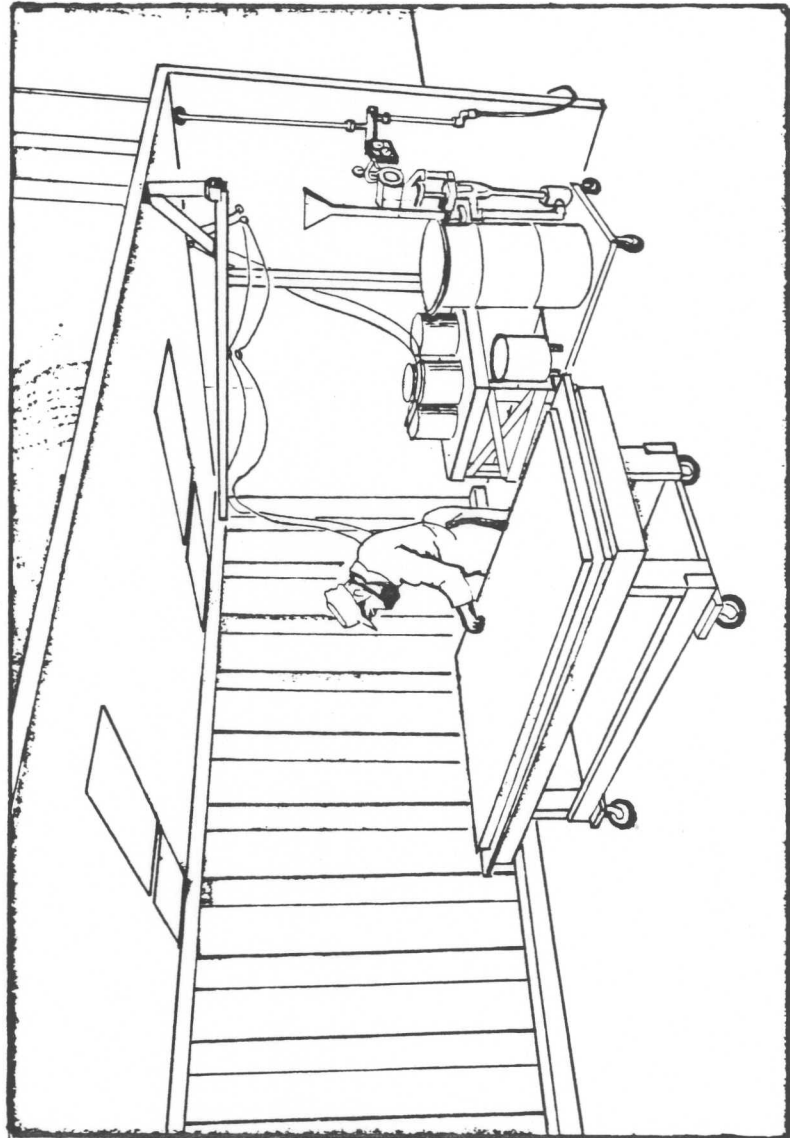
BOOTH IN SMALL PARTS MOLD ROOM
